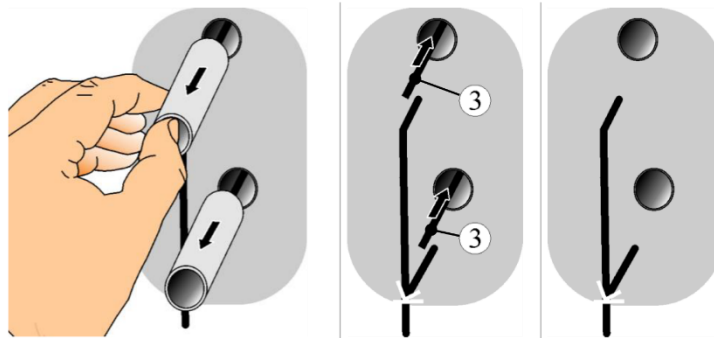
Carefully remove the ceramic feedthrough tube (similar to picture)
